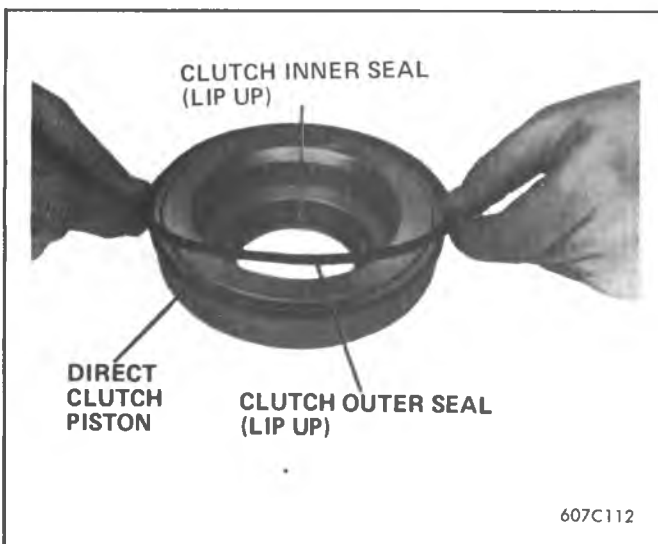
A1-112 Removing Direct Clutch Piston Outer Seal
